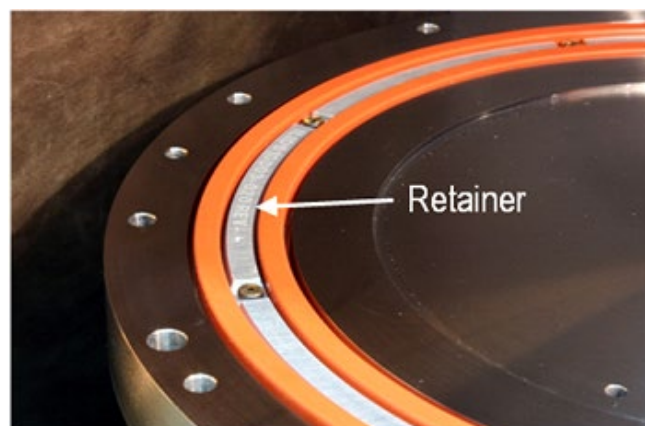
Photograph of subscale multi-piece seal installed in groove in test apparatus.
